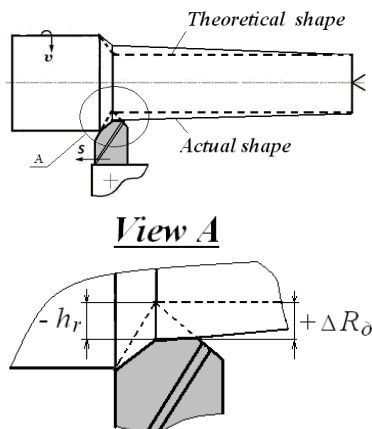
The deterioration of the geometric accuracy of the part because of the size wear of the tool blade
